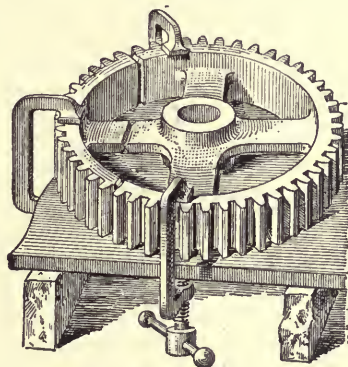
Adjustment before welding of a non-malleable metal article.
